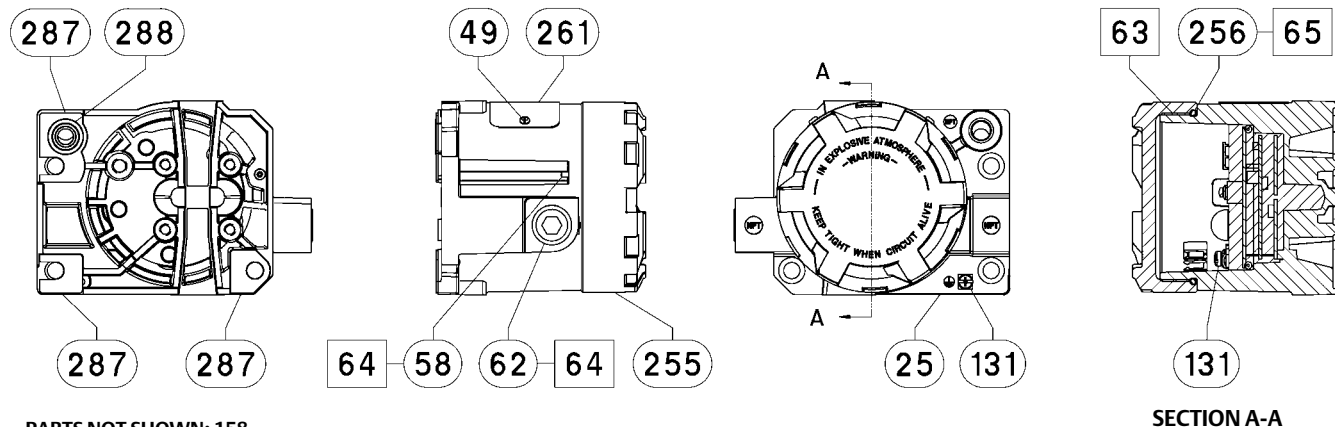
FIELDVUE DVC6205 SIS Base Unit Housing Assembly (continued)
